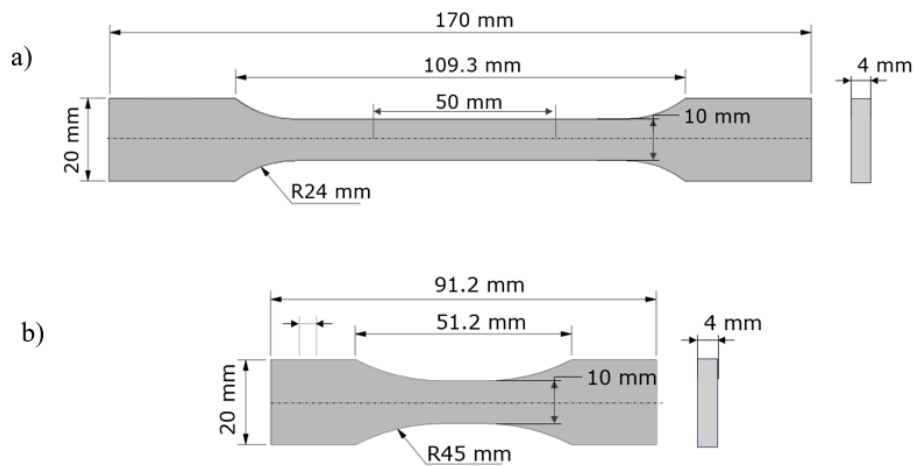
Geometry and dimensions of: a) tensile specimens and b) fatigue specimens
